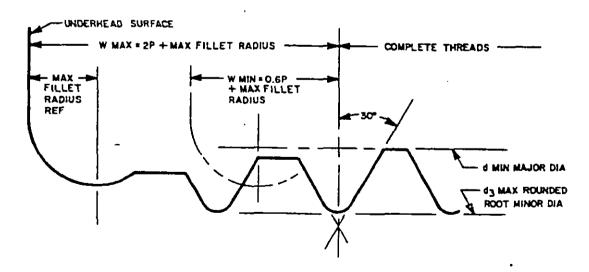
PITCH DIAMETER SHANK FASTENER-THREADED TO HEAD
